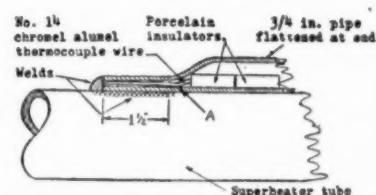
Superheater tube thermocouple (pipe flattened at end)
